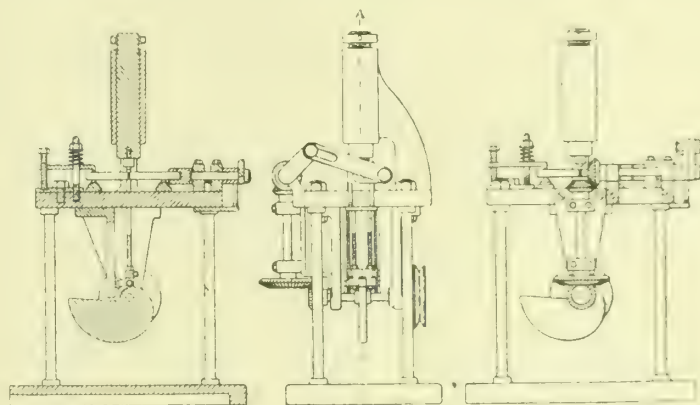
REPEATED-IMPACT TESTING MACHINE FOR BENDING OF NOTCHED SPECIMENS.
